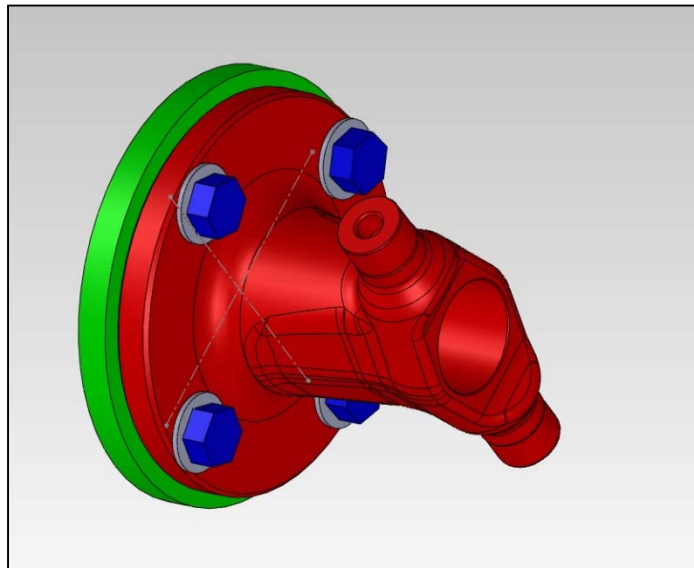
Outer Joint to Flange 1 Bolted Assembly
